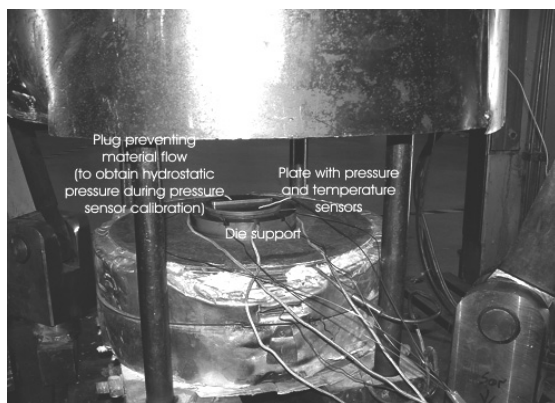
The SINTEF laboratory extrusion die set-up and pressure sensor calibration technique
